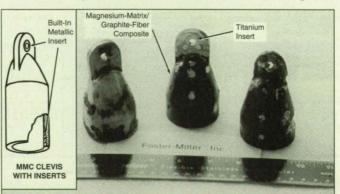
These Clevis Tube-End Fittings are made of magnesium-matrix/graphite-fiber composite with titanium inserts. The composite parts were molded to their final dimensions in a single step.
